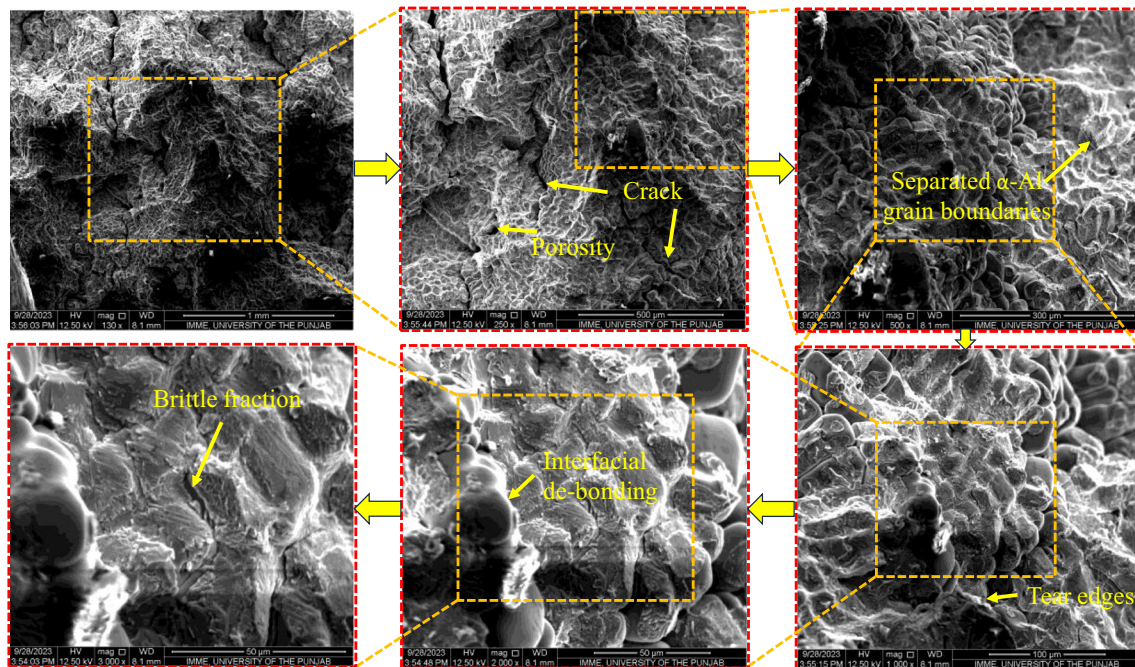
SEM analysis of the fractured surface of squeeze-casted AA2024/2%Al₂O₃/2%SiC/2%Si₃N₄/2%BN hybrid composite Charpy impact specimen
